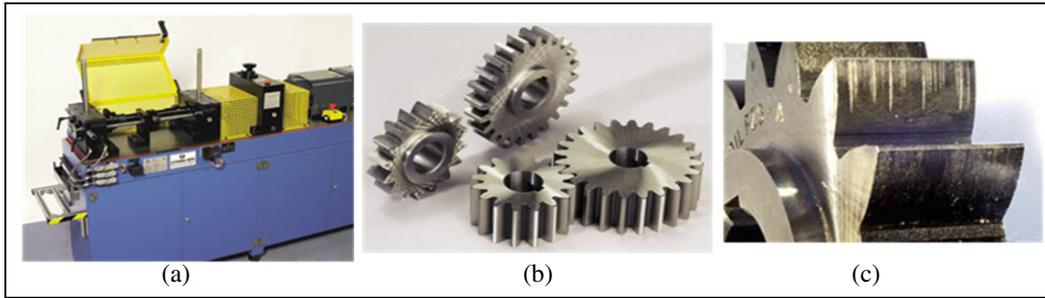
FZG machine (a), testing specimens (b), example of FZG gear teeth with scuffing marks.
